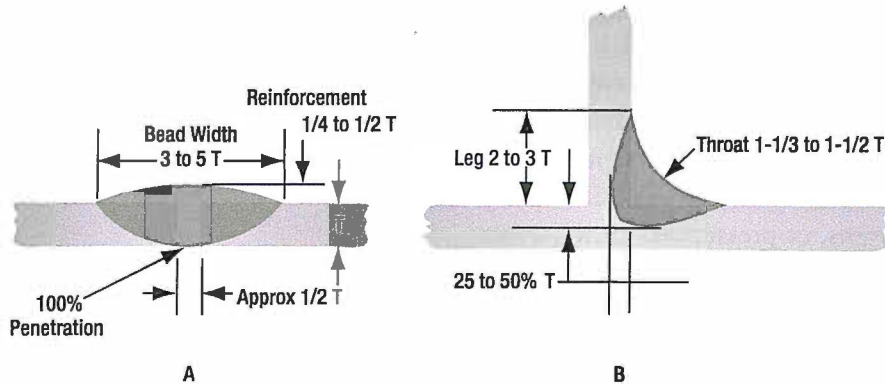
(A) Butt weld and (B) Fillet weld, showing width and depth of bead.
